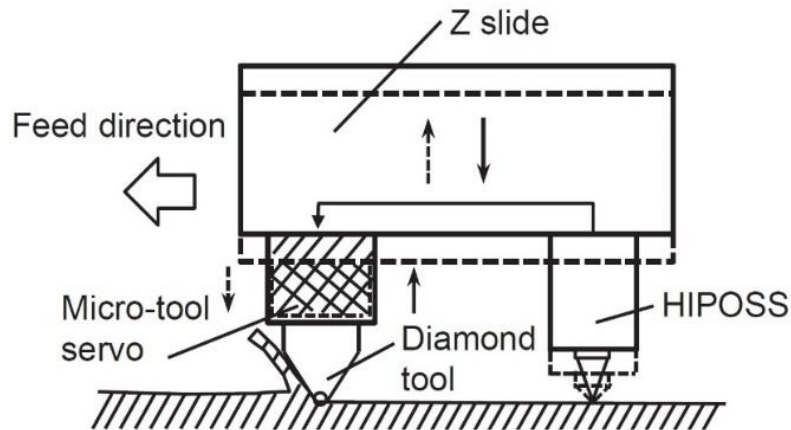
Principles of the workpiece-referred control system. If the tool-holder moves towards or away from the workpiece, the microtool servo compensates the movement [19].
